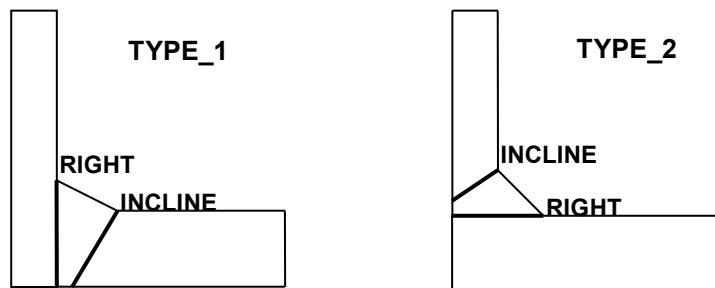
a: Definition of the position of a crack according to the type of the welding
